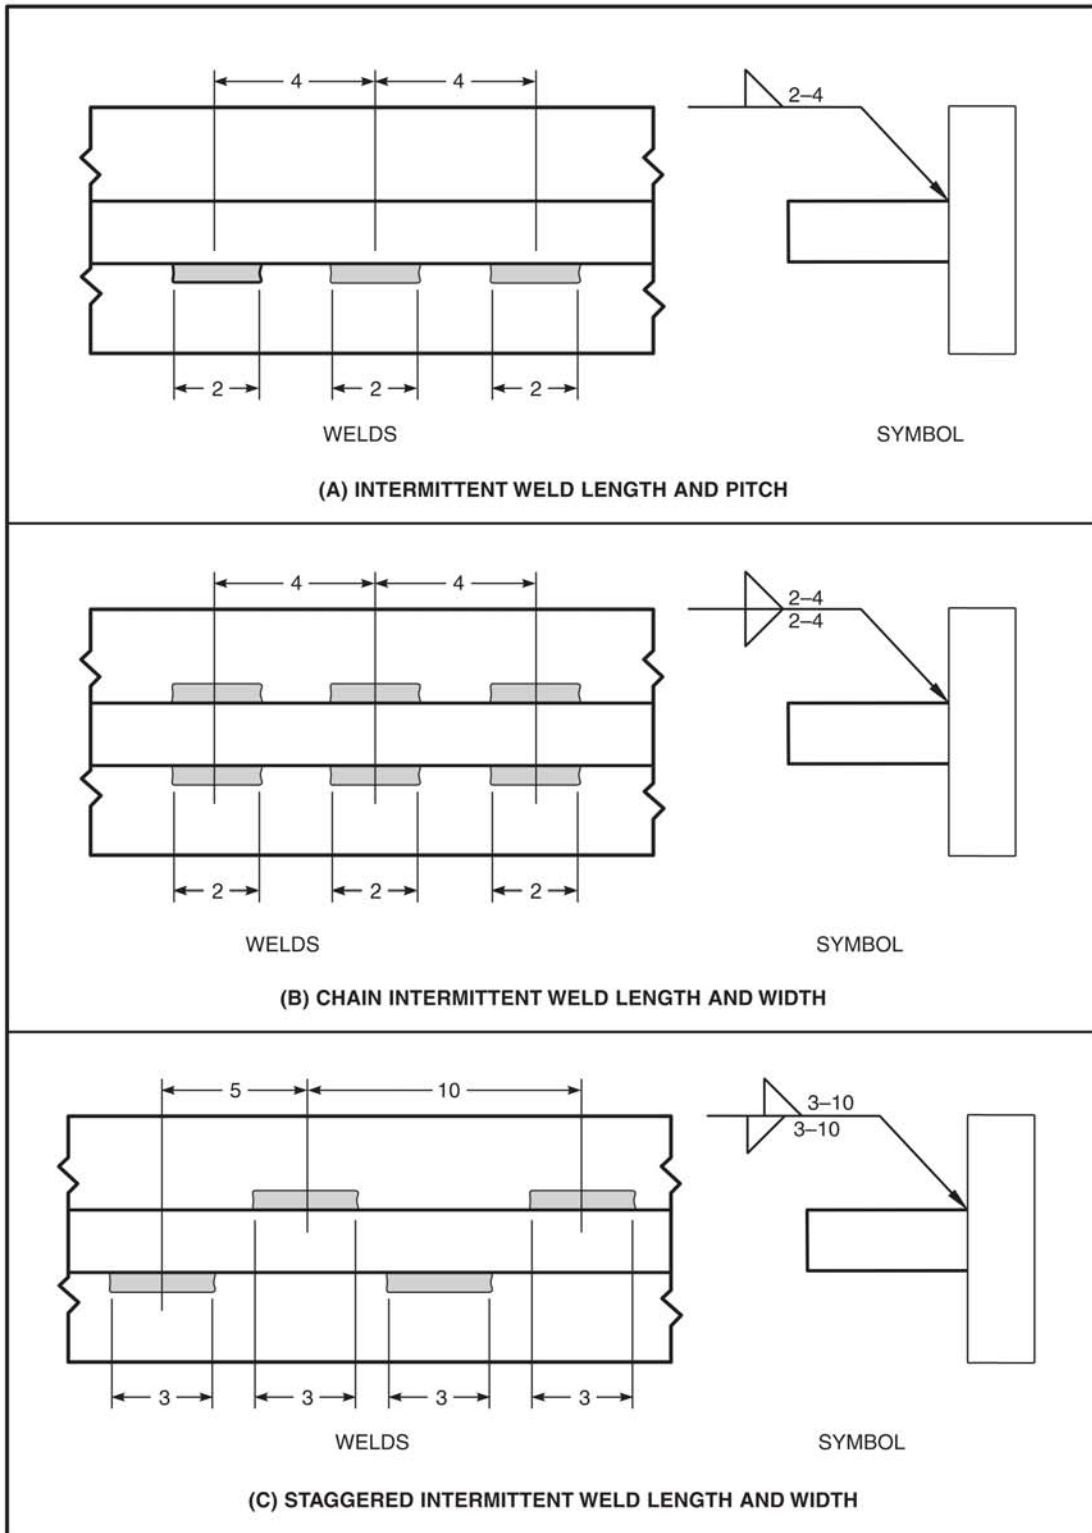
Application of the Intermittent Fillet Weld Symbol
